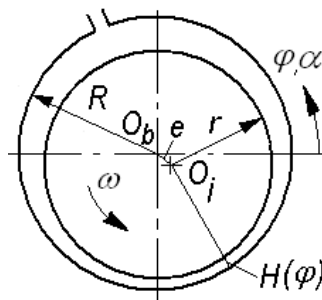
Geometry of cylindrical journal bearing; e – eccentricity, O_b, O_j – bearing and journal radius, ω - angular velocity
